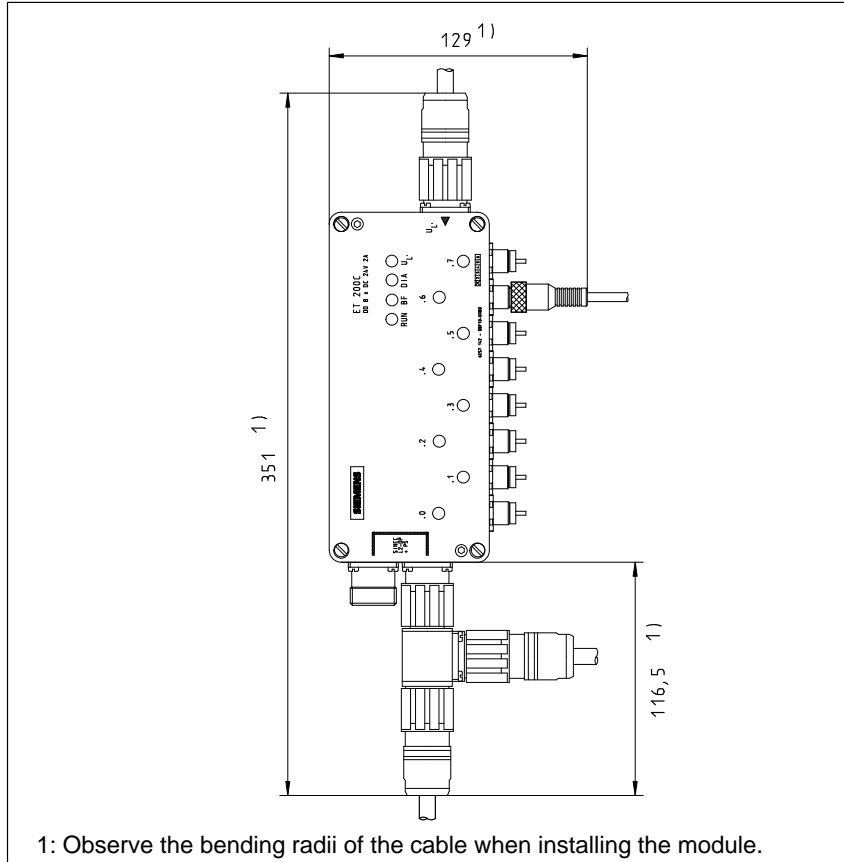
Digital Output Module ET 200C; DO 8 × DC 24 V/2A; Dimension Drawing with T Connector and Plug Connectors (with Pin/Socket Inserts)
